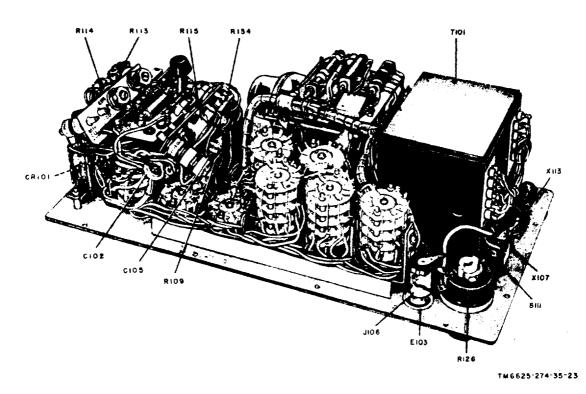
Test Set, Electron Tube TV-7B/U, front-right oblique.
